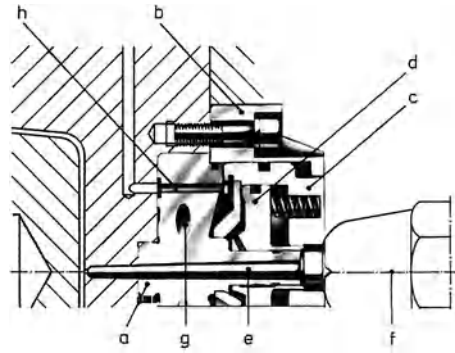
Section through the pneumatic sprue bushing (for explanation, refer to text)
